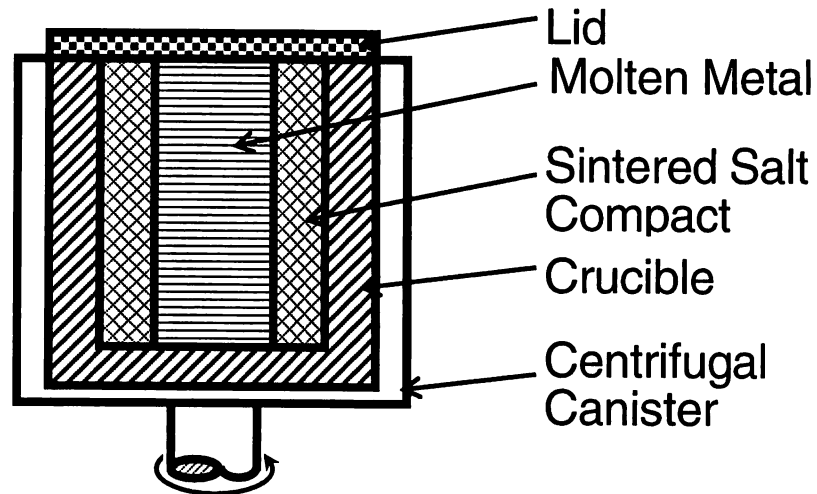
Schematic drawing showing centrifugal squeeze casting system.
